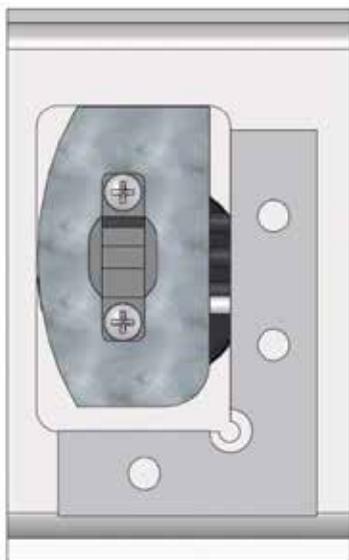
Improper Optical Switch Installation Bottom View 1
